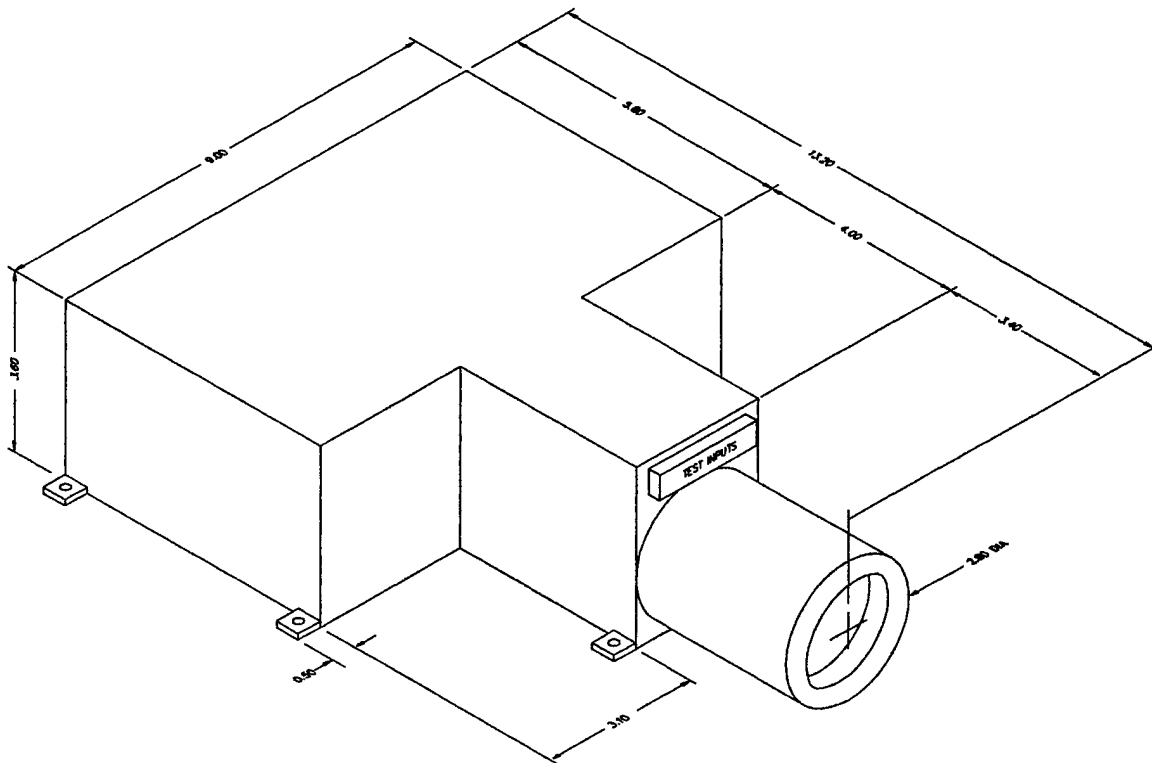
Protoflight Spectrometer Outline Drawing (all dimensions in inches).
